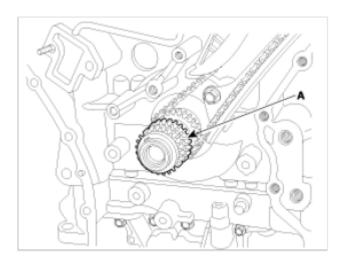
Identifying Crankshaft Sprocket (O/P & RH Camshaft Drive)
